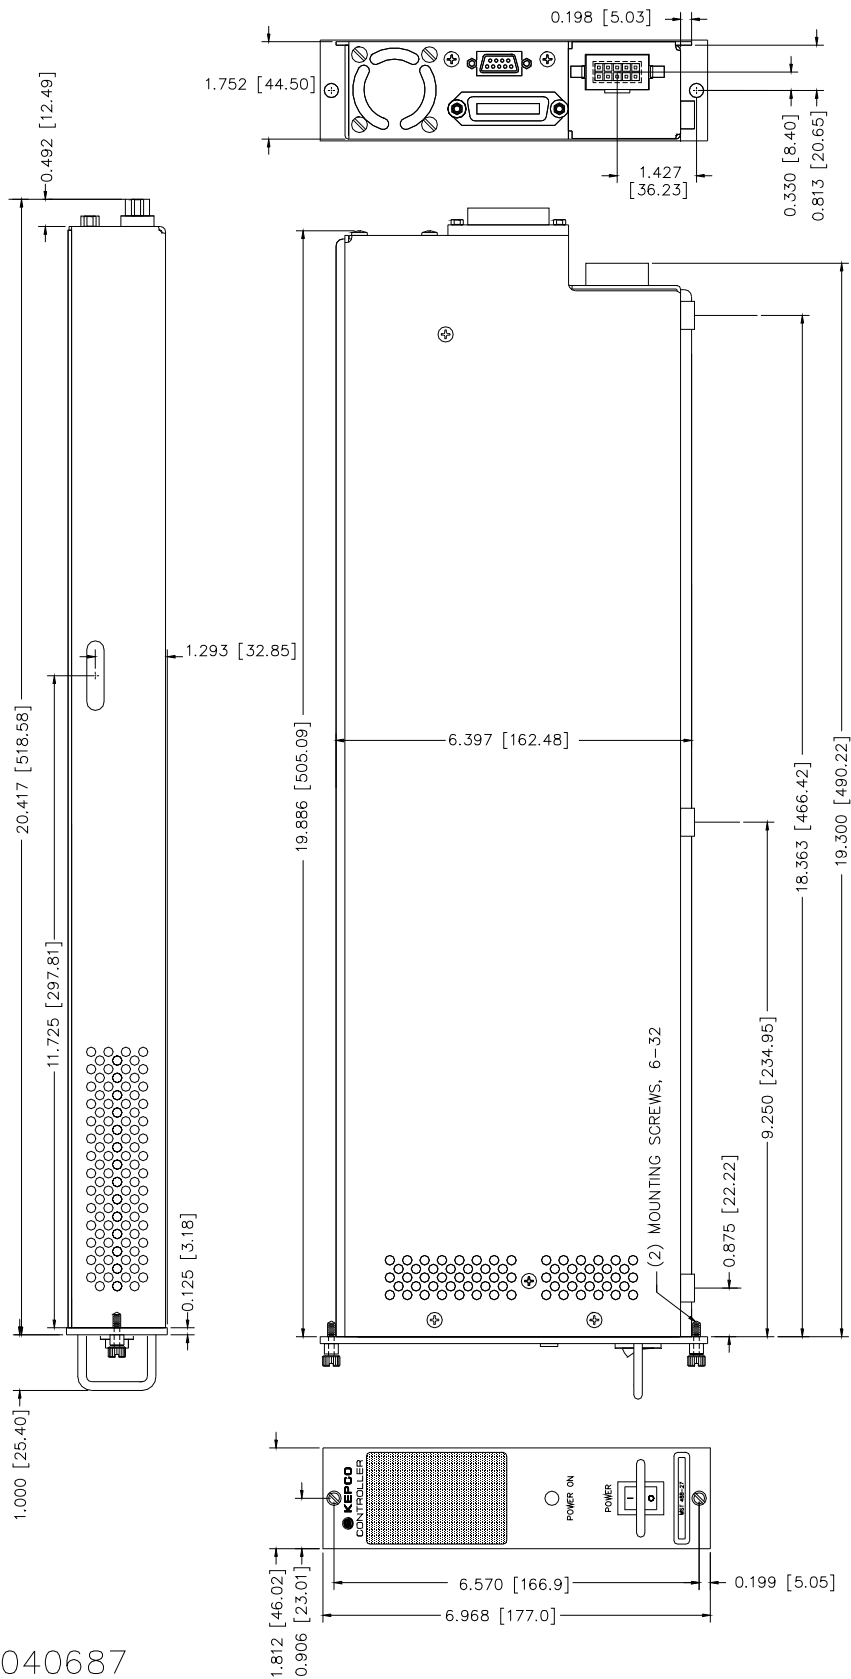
MST 488-27HT CONTROLLER OUTLINE DRAWING
